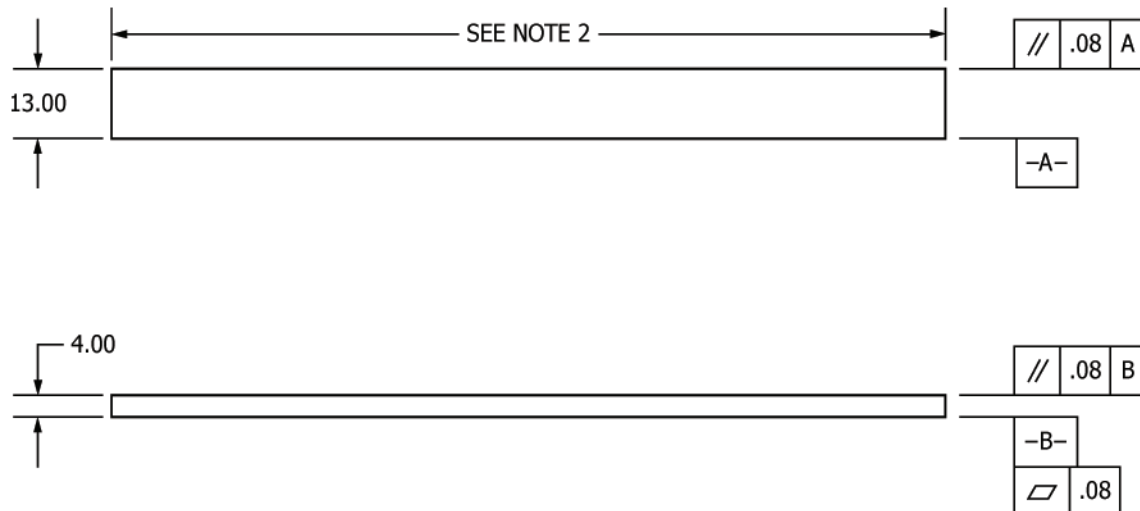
Standard Flexural Test Specimen Drawing (SI)
